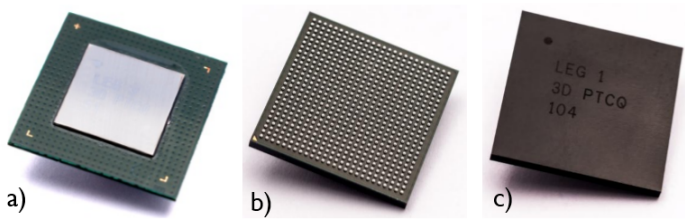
Photographs of the 3D SIC package, where figure 8.10 a) reveals the 3D stack to substrate assembly phase, figure 8.10 b) the backside of the package with the solder ball array visible and figure 8.10 c) the top side of the molded package.
